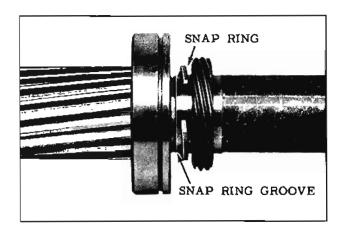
Snap Ring Position Prior to Disassembly of Main Shoft
